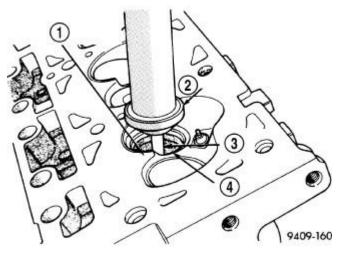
Refacing Valve Seats Courtesy of CHRYSLER LLC
